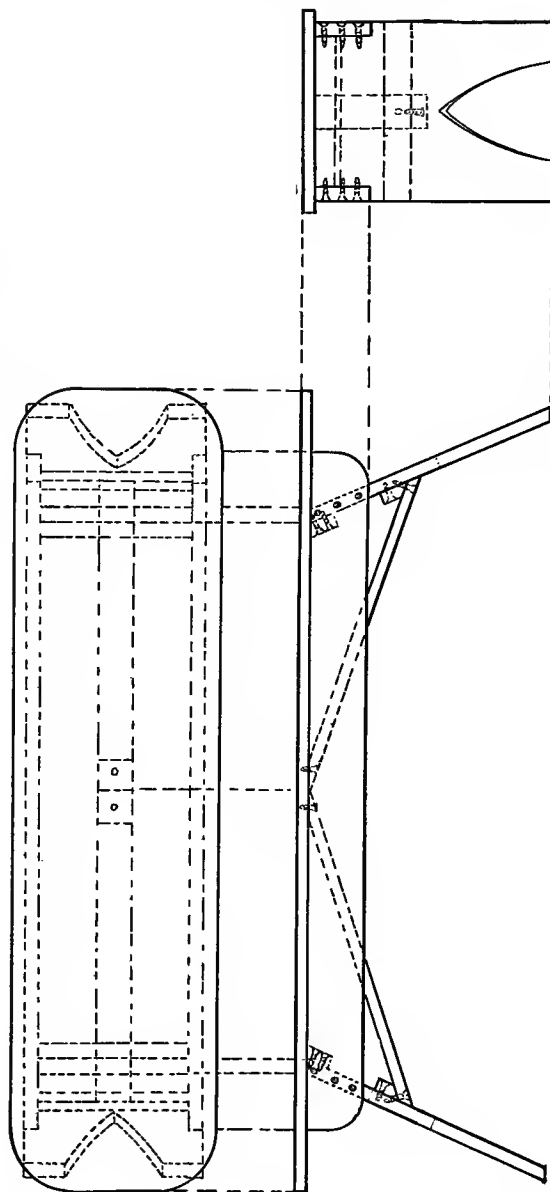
Mechanical Drawing of Utility Bench without Dimensions
